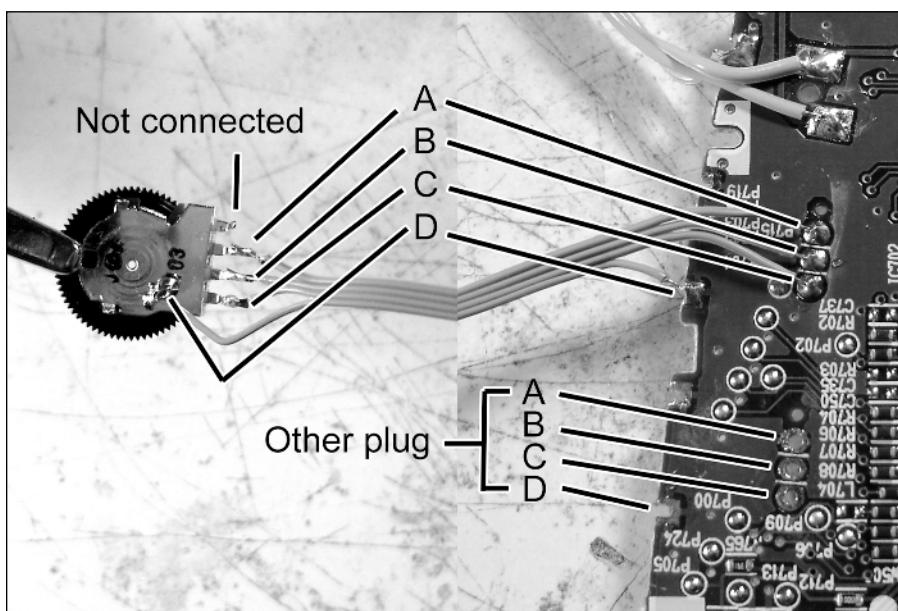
Reconnecting a knob. Bend out the pins on the knob as shown, using your tweezers for best results.
